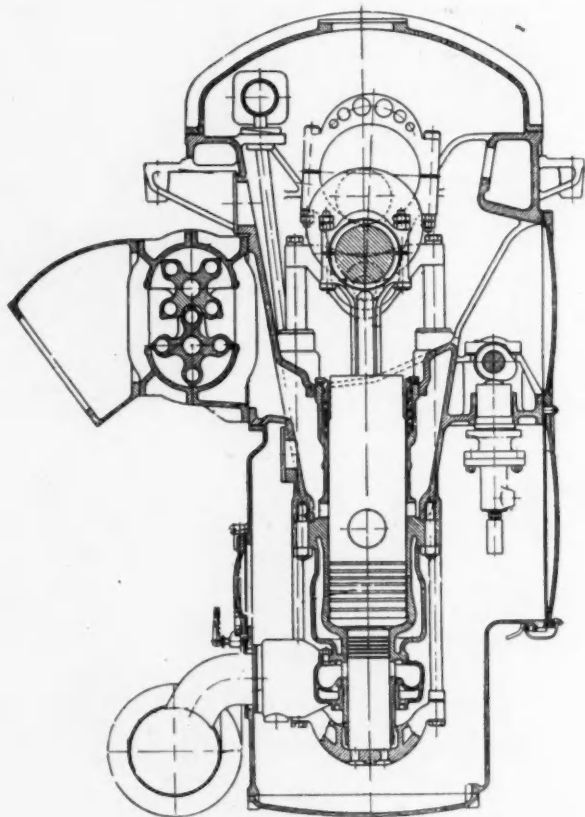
Section of Burmeister & Wain Diesel Engine with Box Section at Bottom of Crankcase
